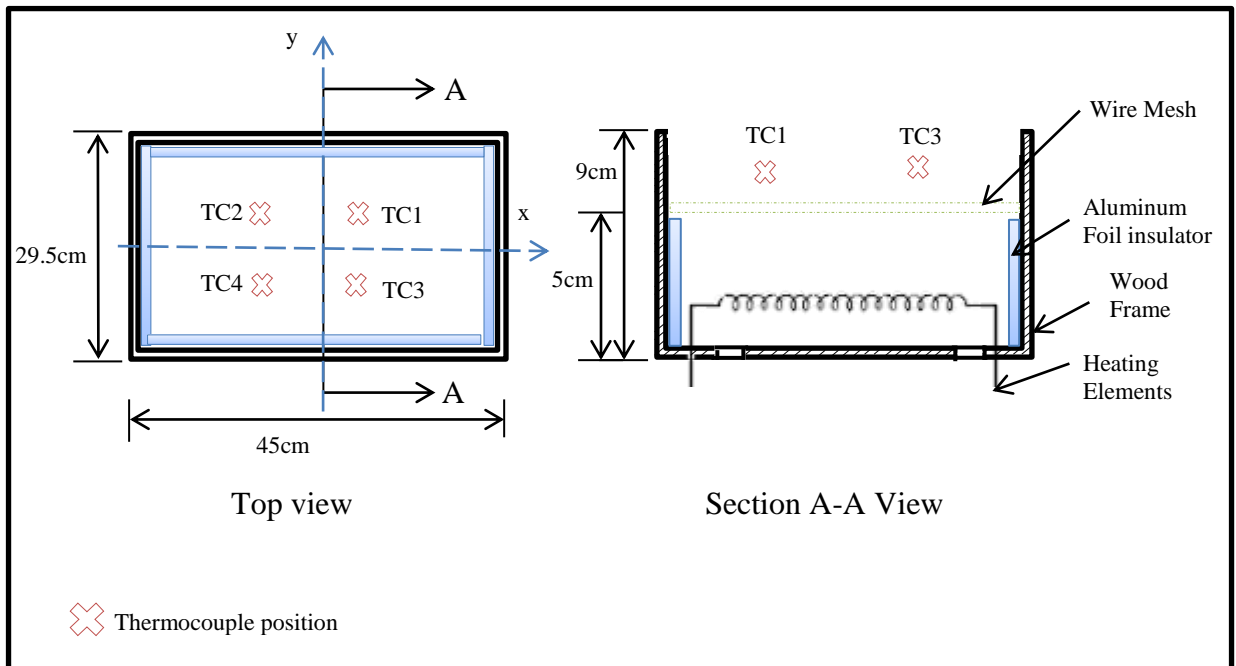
Thermocouple Position for Experiment 1 on Thermoforming Equipment Heating section.
